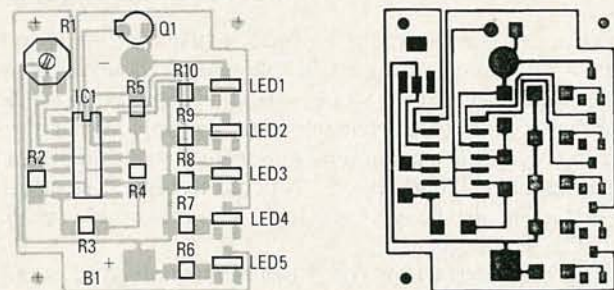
USE THIS LAYOUT a when building the circuit. The PC board is shown in b.
